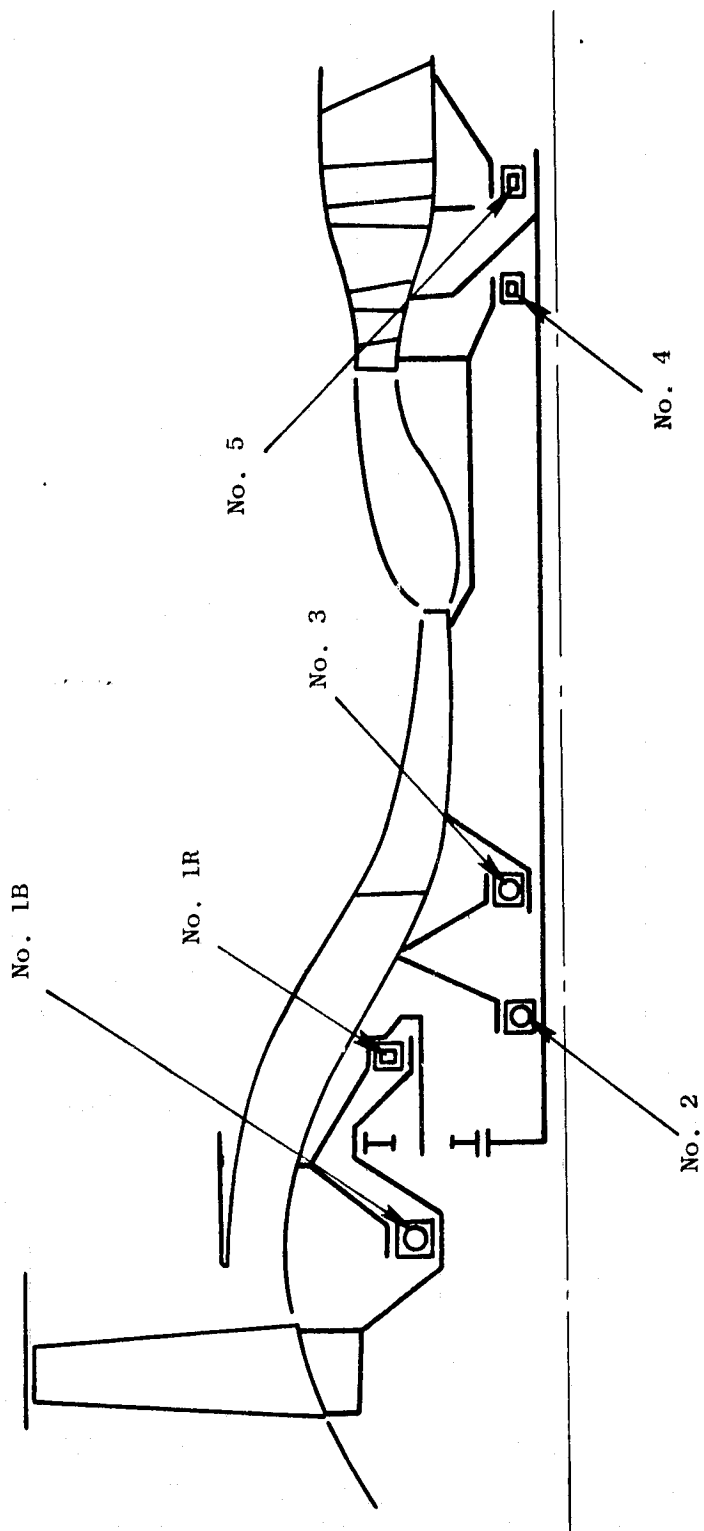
Schematic of Main Shaft Bearing Arrangement.
